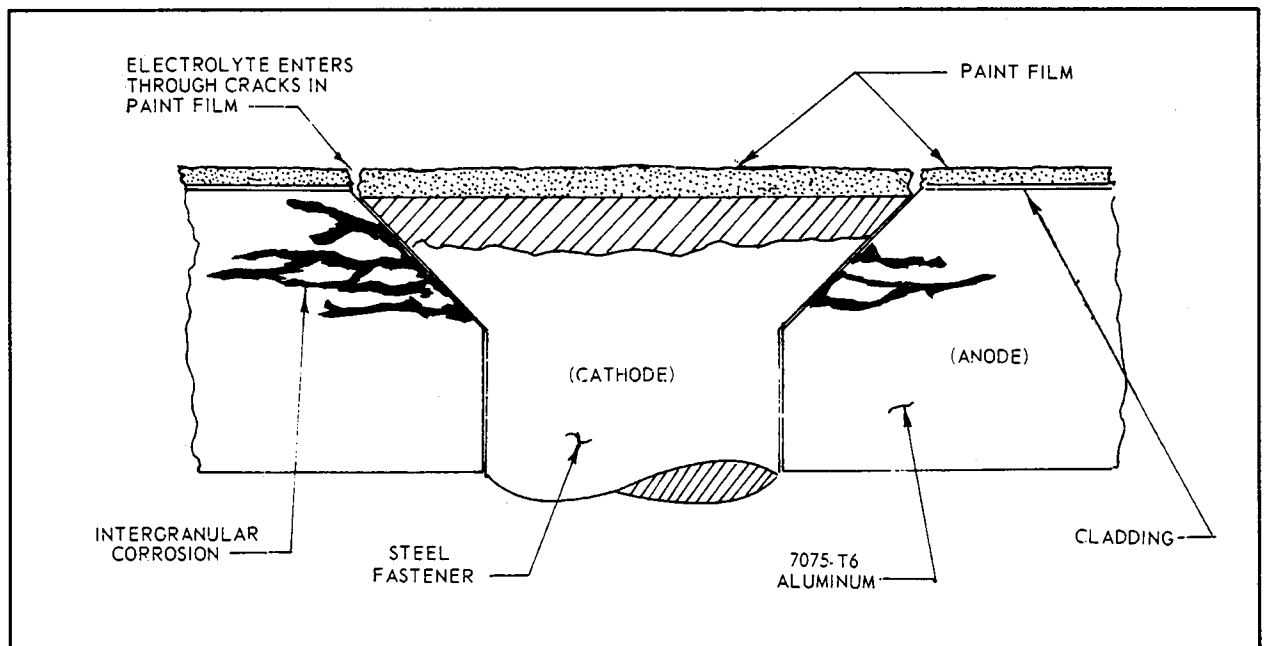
INTERGRANULAR CORROSION OF 7075-T6 ALUMINUM ADJACENT TO STEEL FASTENER
